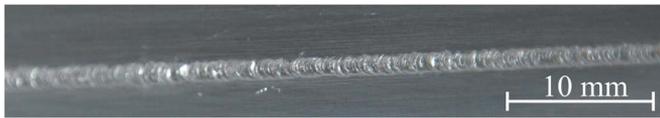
Closeup photograph of the weld between the two jacket halves.
